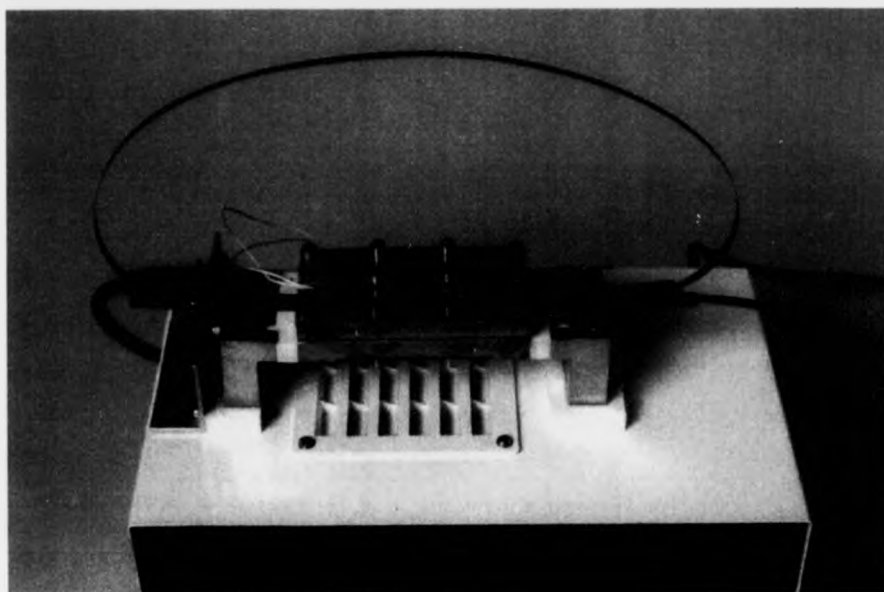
Welding rig for thermoplastic prepreg tape.
